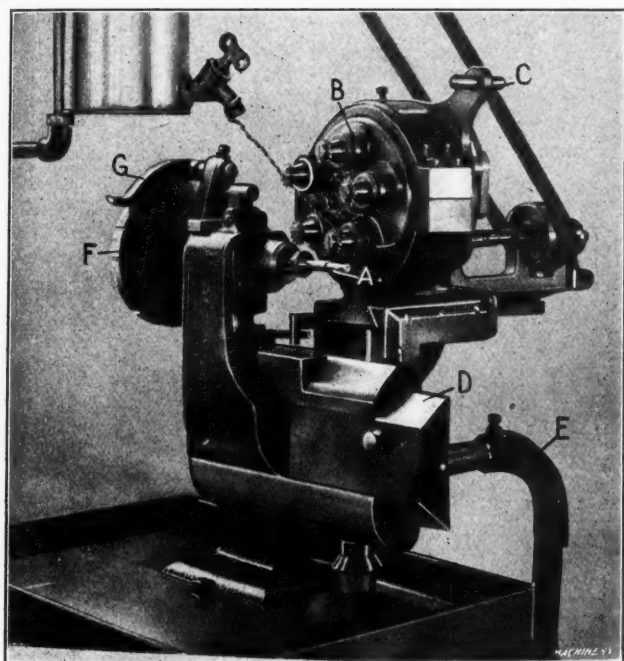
Machine for Cutting Brass Escape Wheel Teeth
